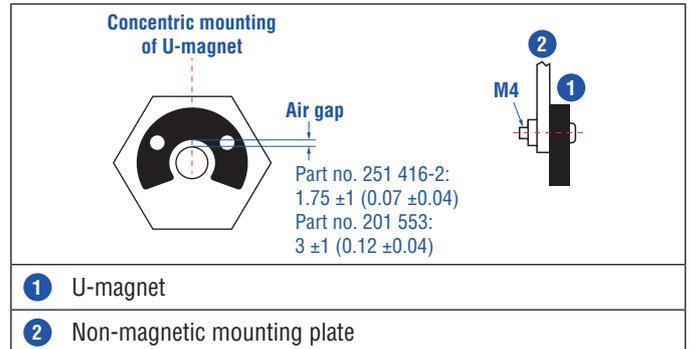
Mounting of U-magnet (part no. 251 416-2 or part no. 201 553)
